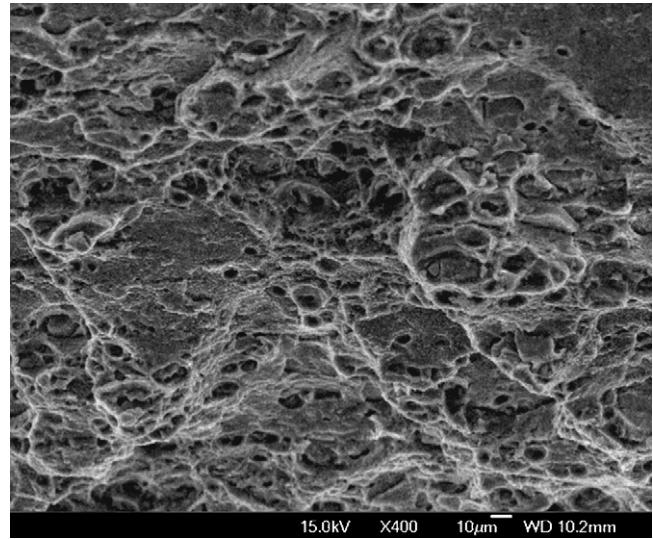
Fracture surface of the tensile tested specimen at a welding speed of 115 mm/min.
